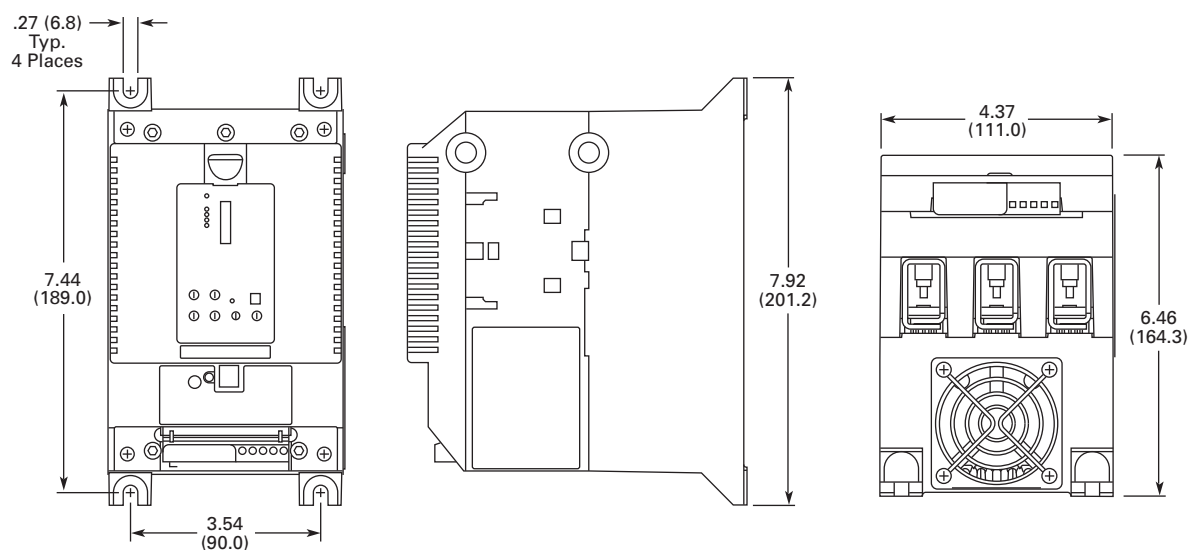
R-Frame (110 mm) S801 Approximate Dimensions in Inches (mm)
